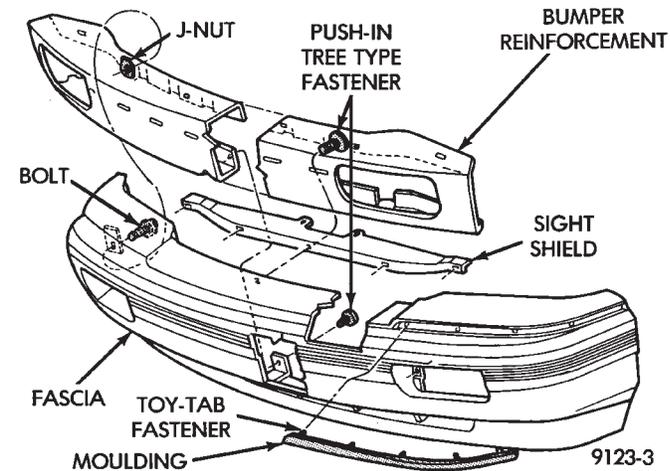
Front Bumper Overhaul—AA-Vehicle
